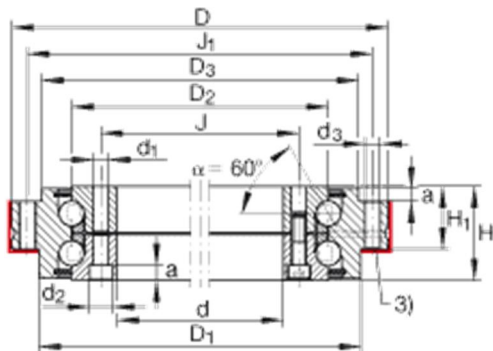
Diagram of ZKLDF axial angular contact ball bearings
